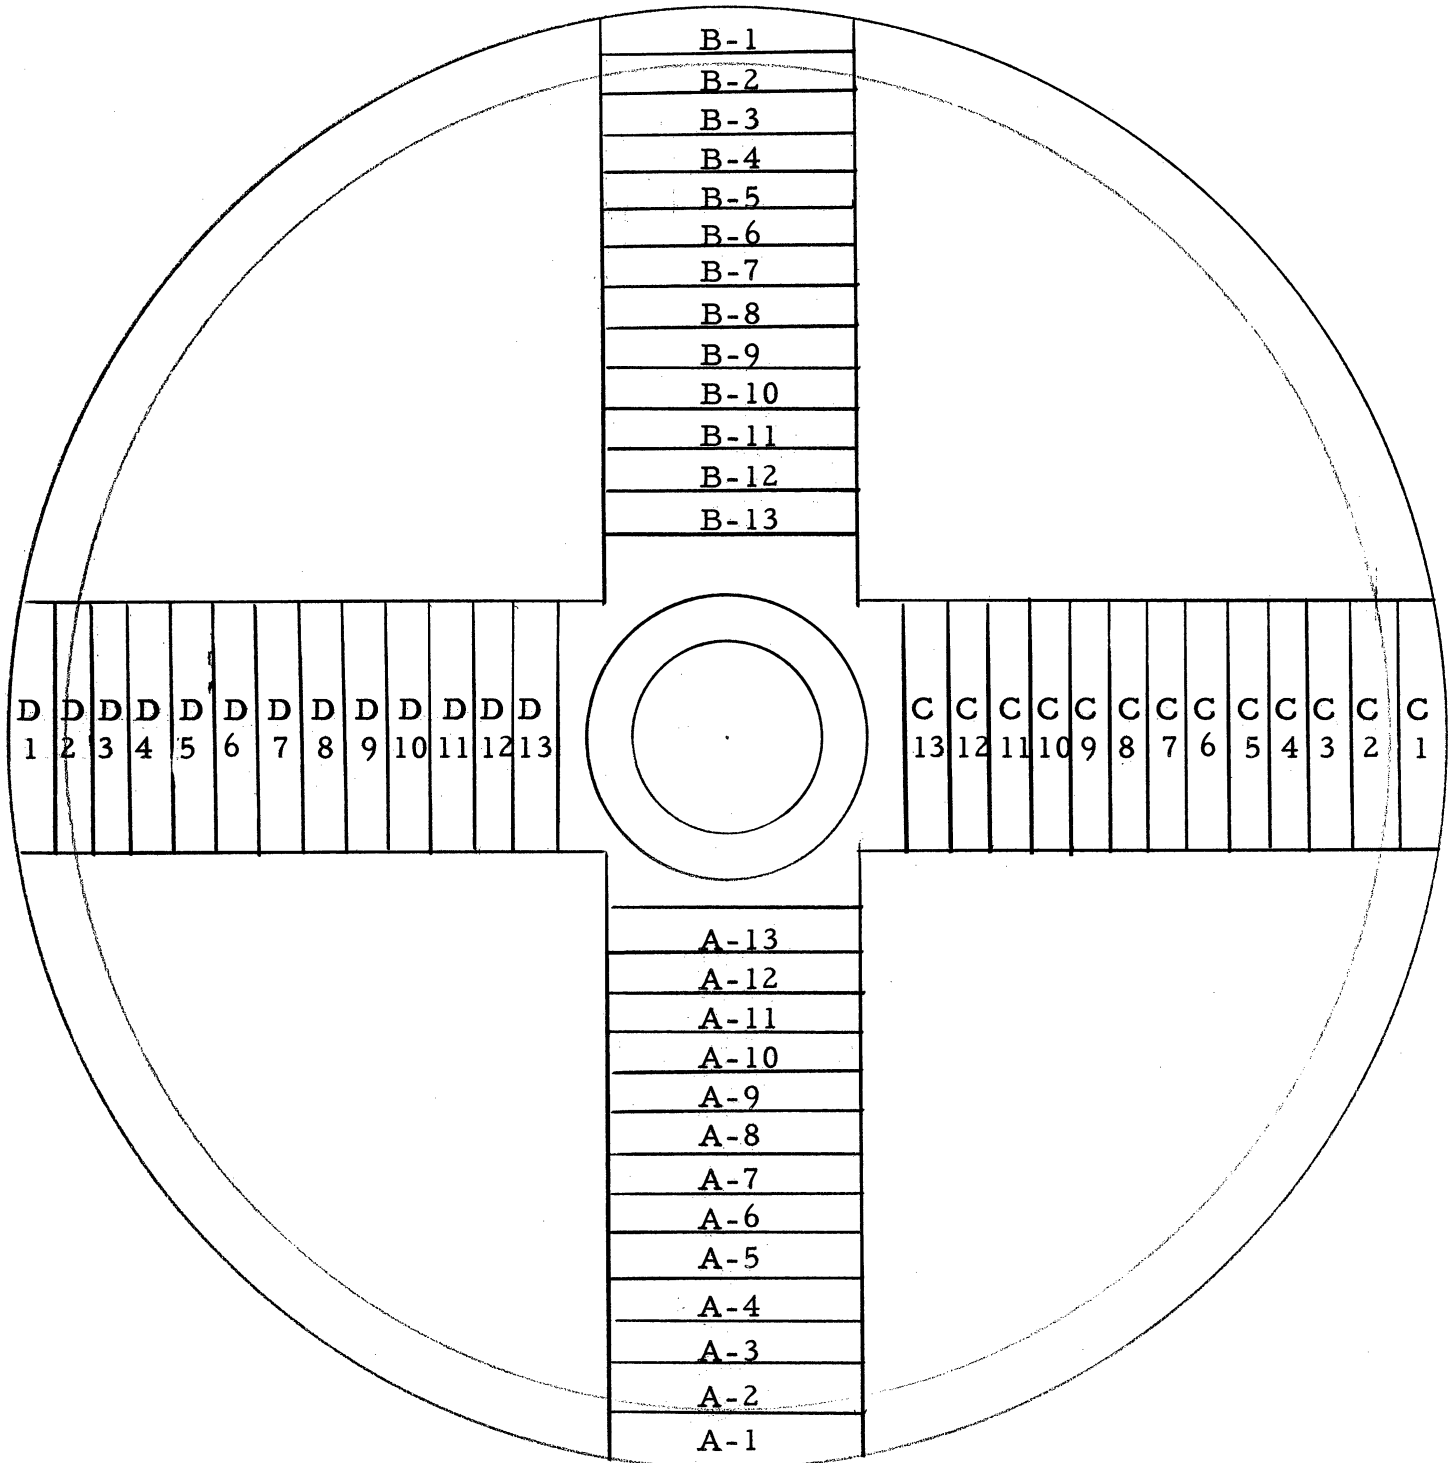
Sketch Indicating Locations in V-57 Forging Serial D-862 from which Specimen Blanks were Sampled.
